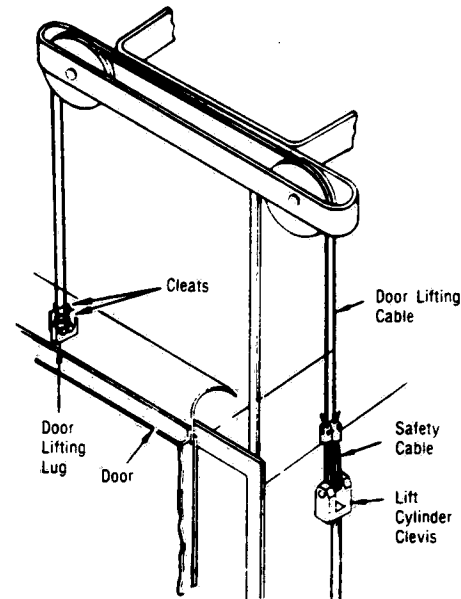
ROUTING DOOR LIFTING CABLE.
